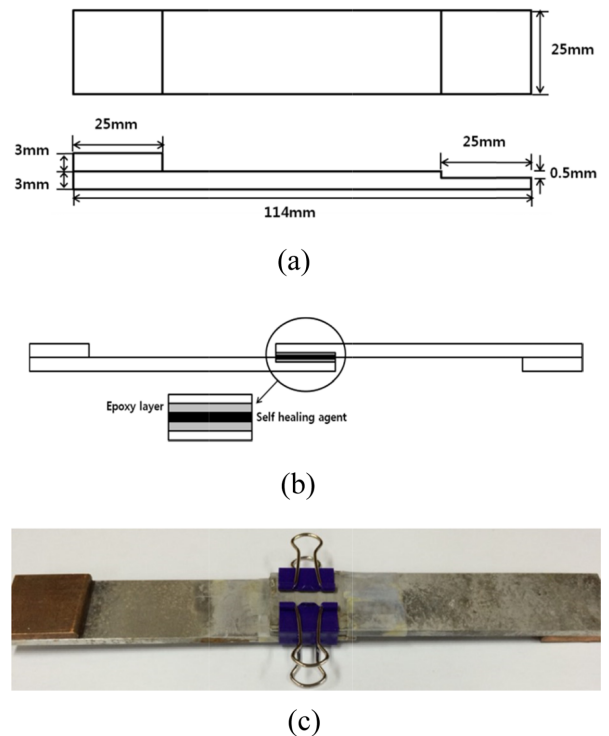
(a) Specimen dimensions; (b) schematic; (c) visual appearance of the joint geometry for single lap shear testing.
